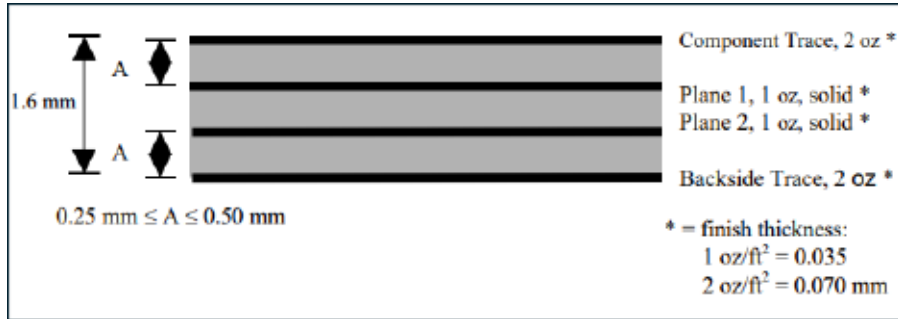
Cross section of multi-layer PCB showing trace and dielectric thicknesses.
